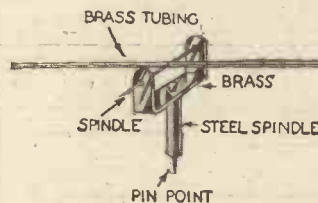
How the spindle is mounted on a U-shaped piece of brass.
